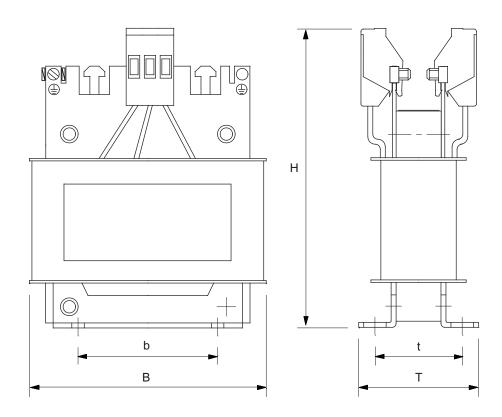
Dimension drawing of line reactor for Smart Line Modules (5 kW and 10 kW)
